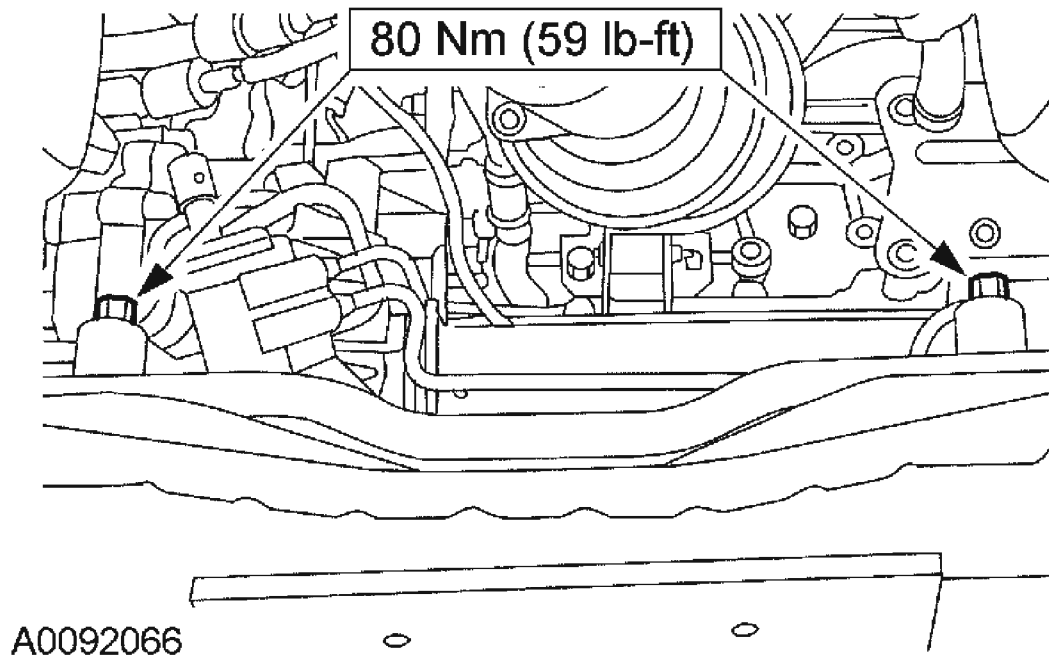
Removing Steering Gear Bolts And Steering Gear
